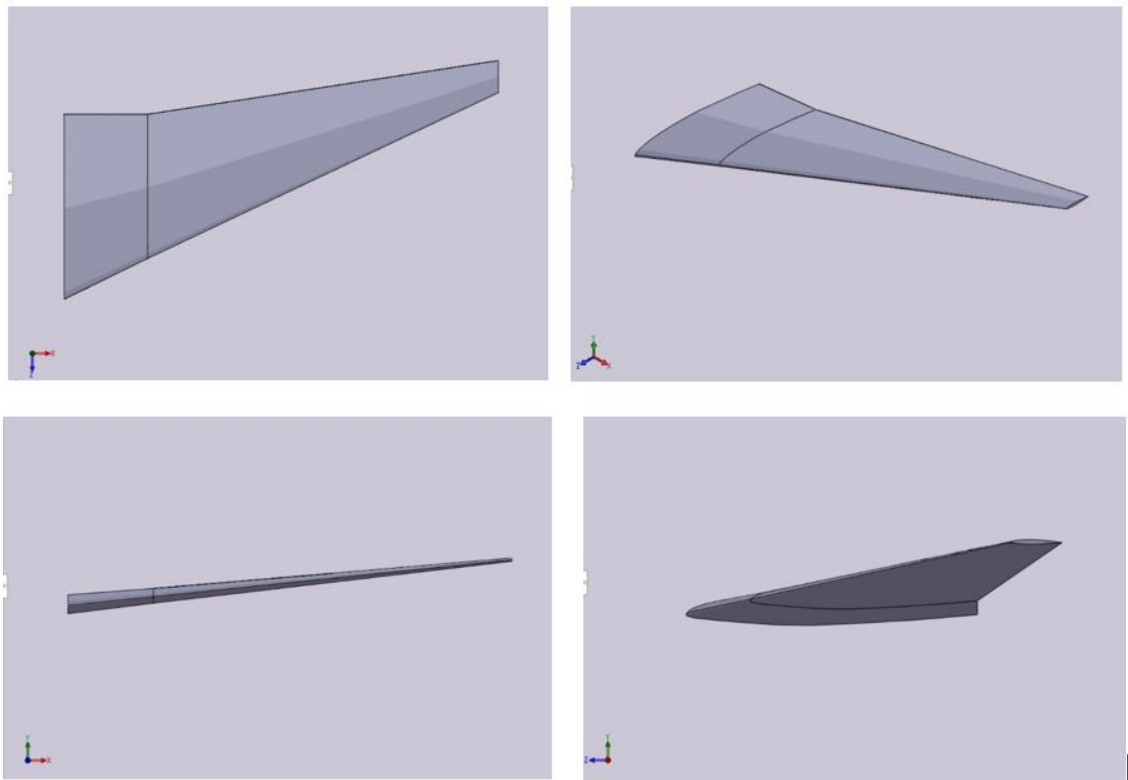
Top, isometric, front and side view of wing design with no wing tip
